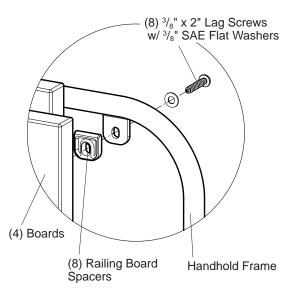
DETAIL FACE BOARD/HANDHOLD ATTACHMENT
